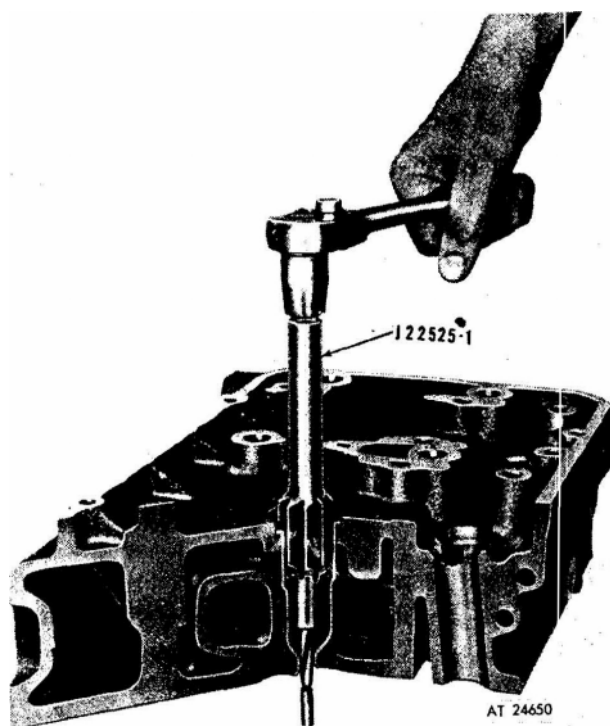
Reaming injector tube for injector body and spray tip with reamer J 22525-1.
